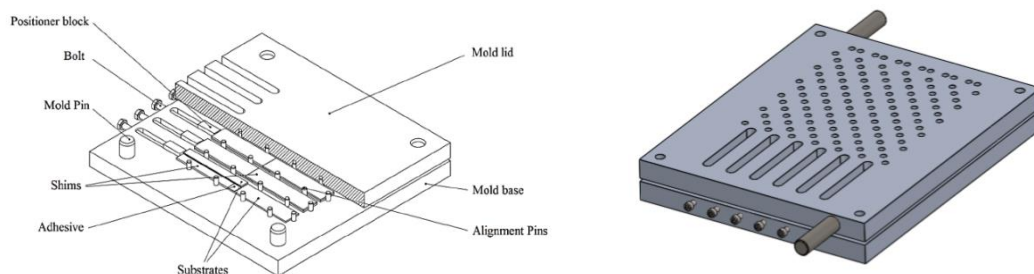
Schematic of the first and second moulds, cut view on the left and closed on the right, respectively.
